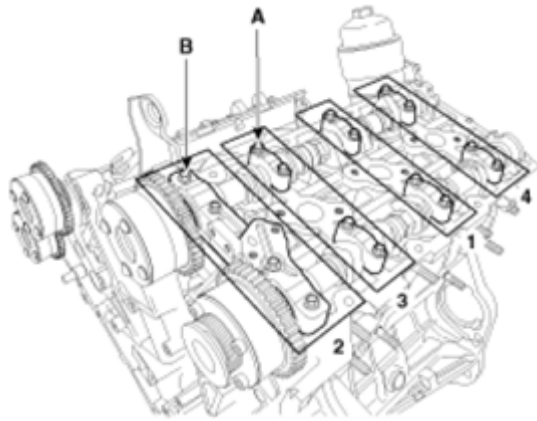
Identifying LH/RH Camshaft Bearing Cap And Thrust Bearing Cap
